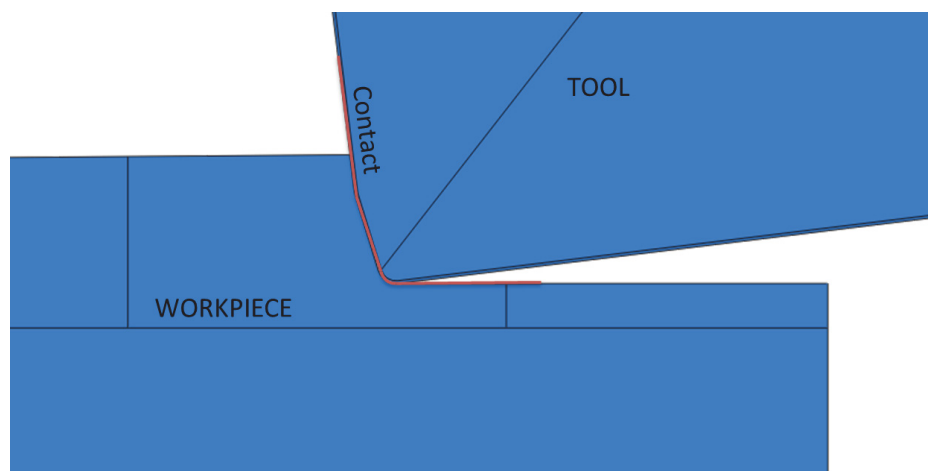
The cutting edge is in contact with the workpiece.
